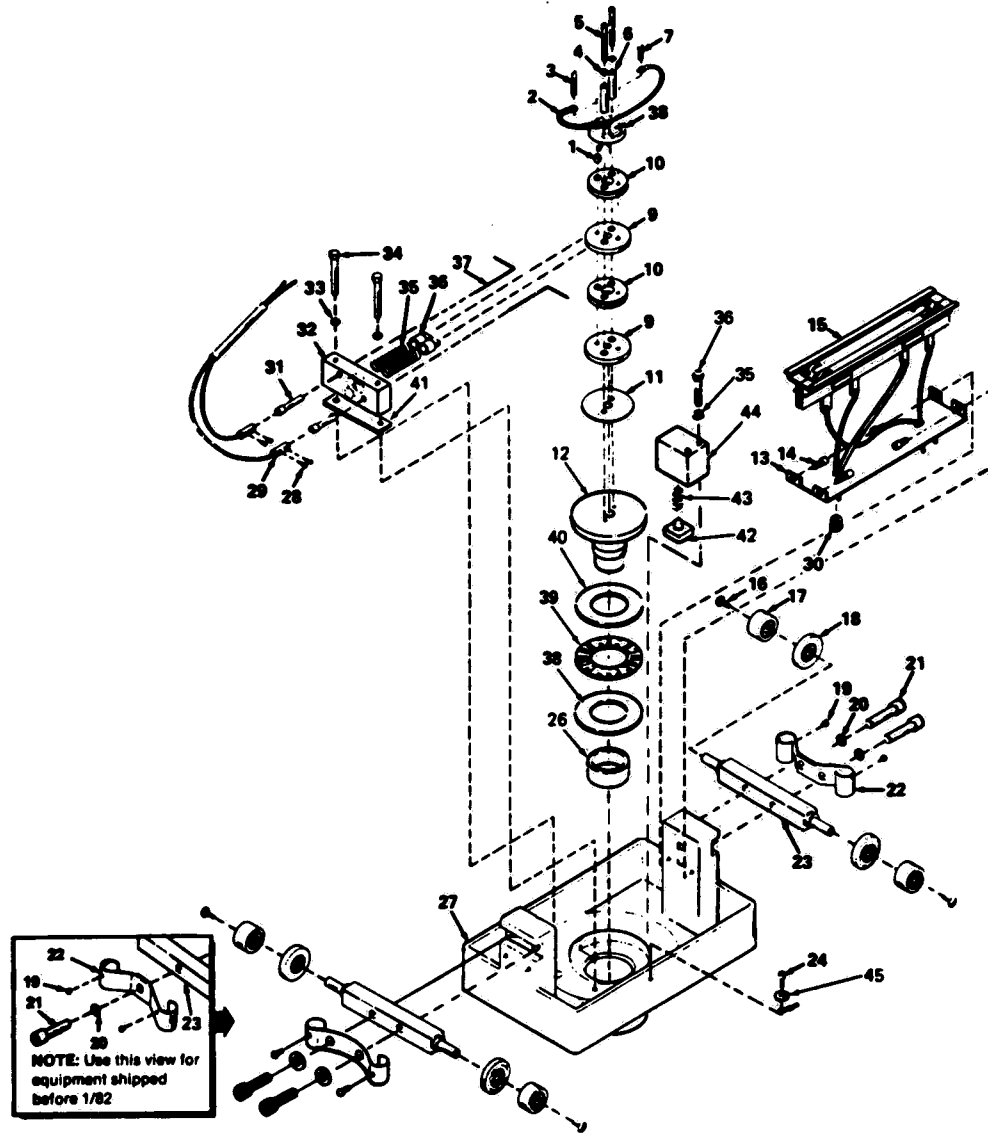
D. LOW CEILING CARRIAGE ASSEMBLY, Units Shipped Between 3/73 and 7/82.
